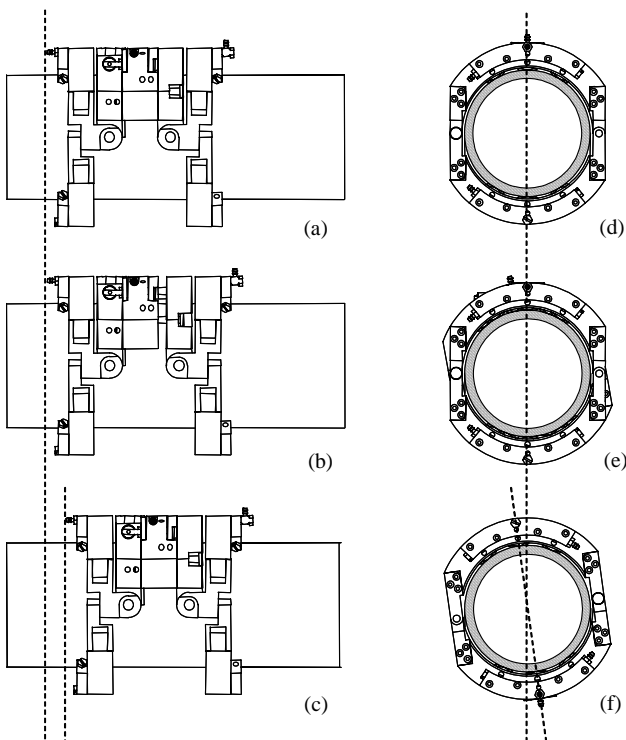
Feeder pipe inspection robot using an inch-worm mechanism
